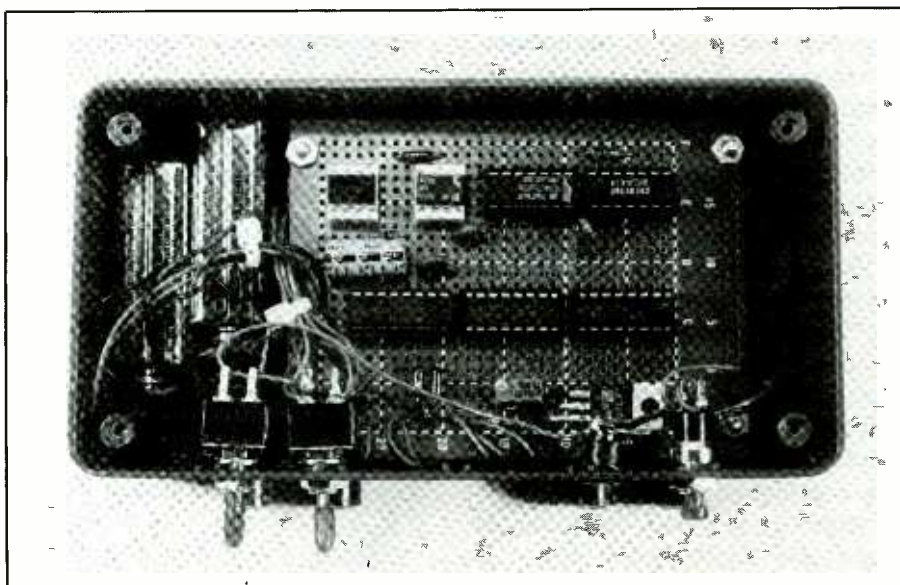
Project be built using pc board or Wire Wrap techniques and materials as shown.
